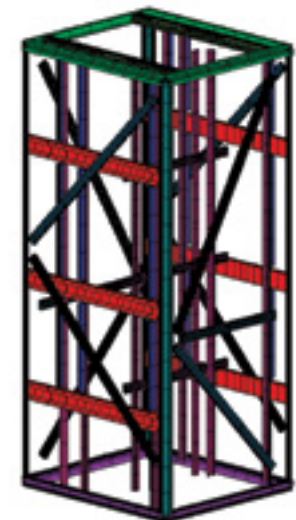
Frame Structure for a Typical Floor-Mounted Cabinet
